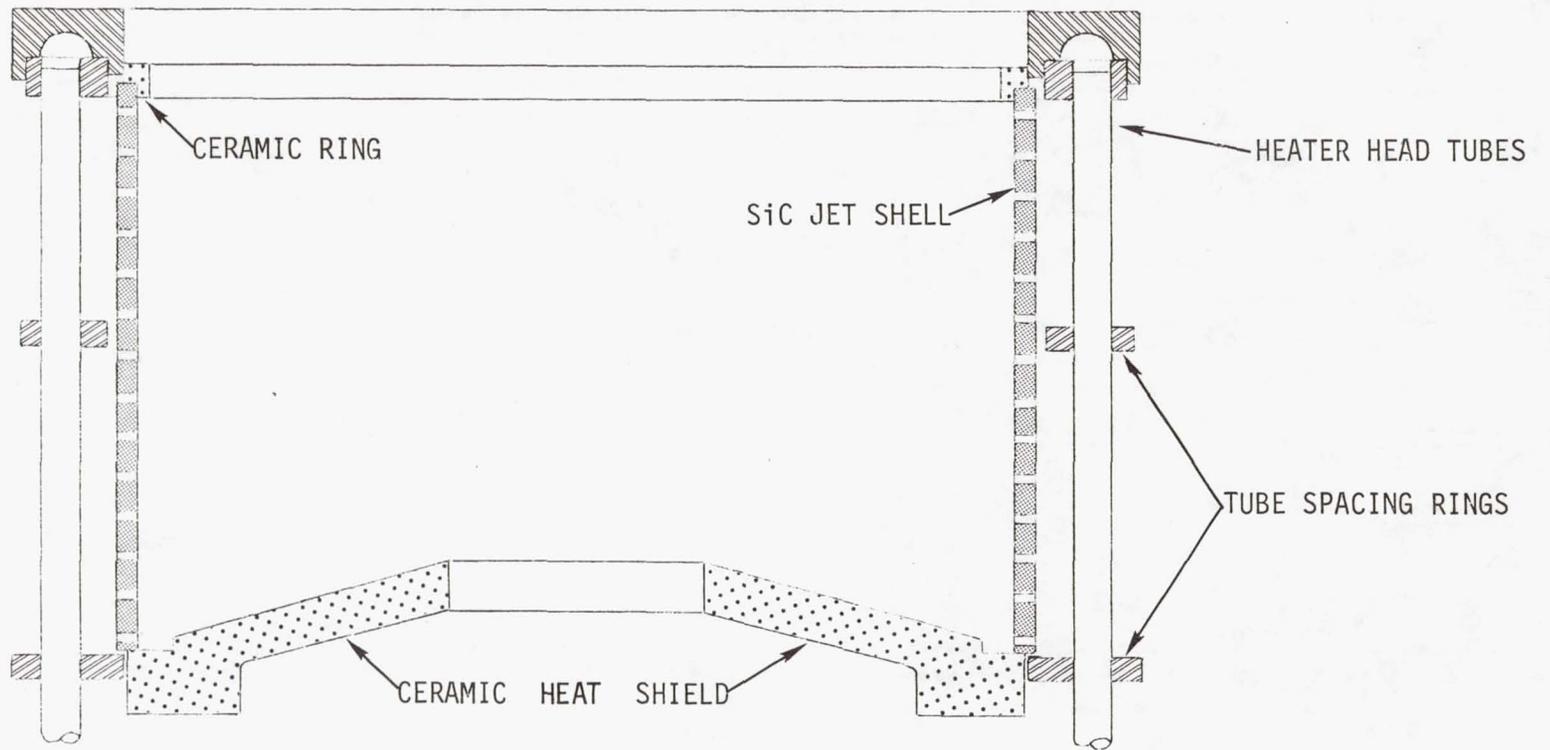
GPU-3 Stirling engine heater head/jet shell assembly.
